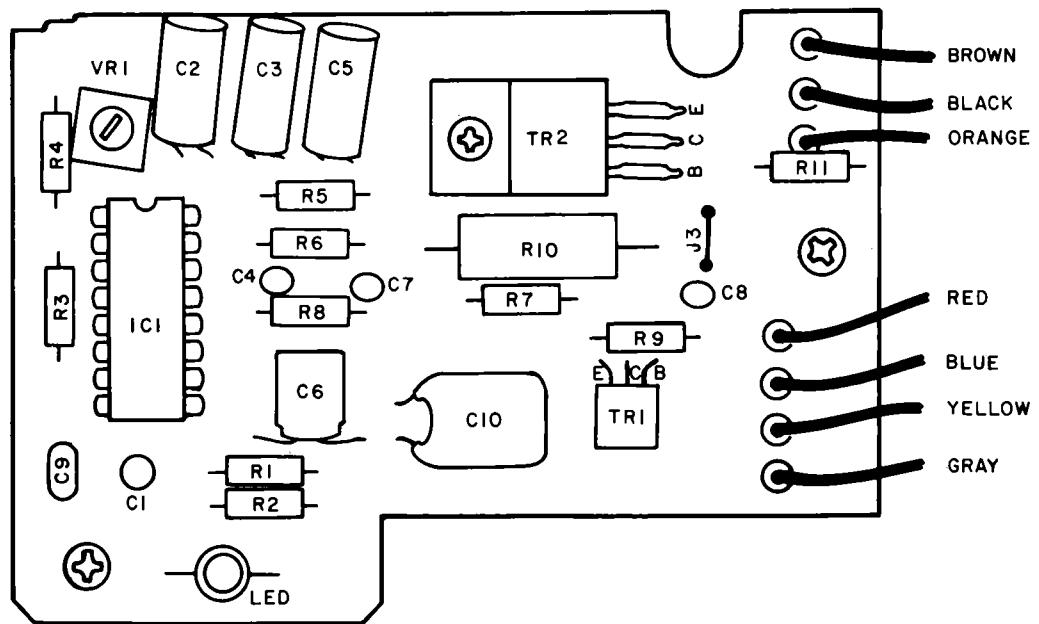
Drive motor servo circuit parts layout, Model 1542.
